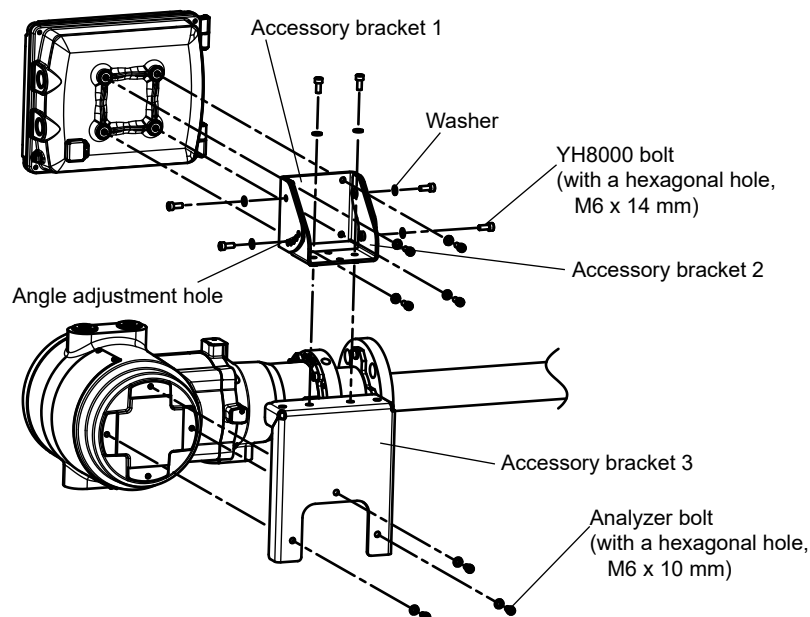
Mounting to the front (TDL8100/TDL8200)
